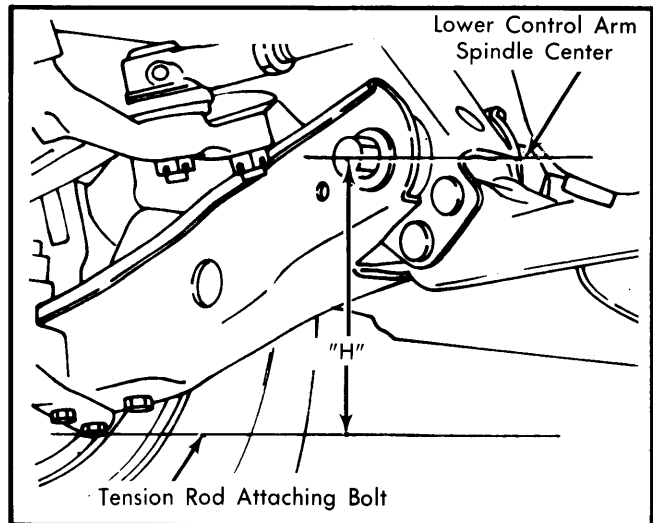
View Showing Dimension "H" (Unladen Vehicle)
